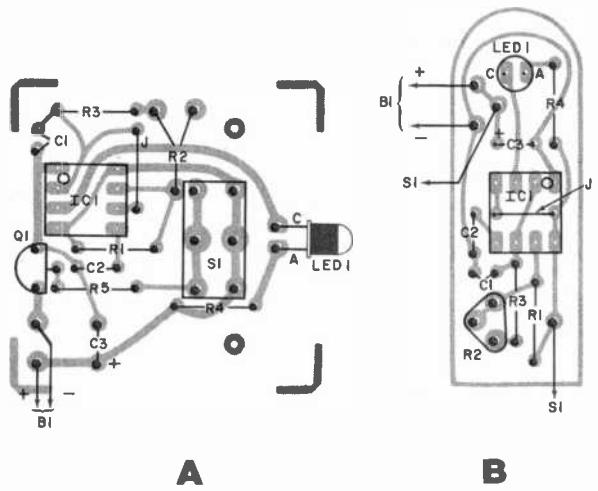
Parts placement guides for the box-style (A) and gun-style (B) infrared transmitters.
